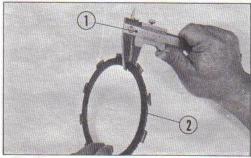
1 Vernier caliper gauge 2 Clutch friction disc
